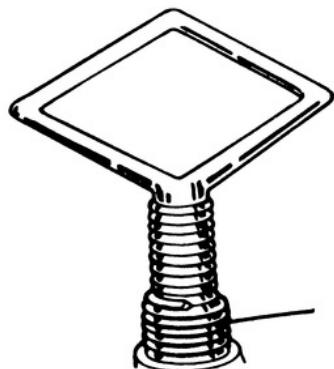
Screw the insert onto the installer tool until the tang engages the slot. Thread the insert into the hole until it is $\frac{1}{4} - \frac{1}{2}$ turn below the top surface, then remove the tool and break off the tang using a punch
